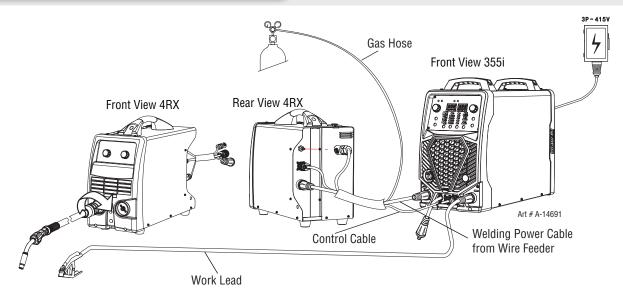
Setup for 4RX Wirefeeder with Gas Shielded MIG Wire
